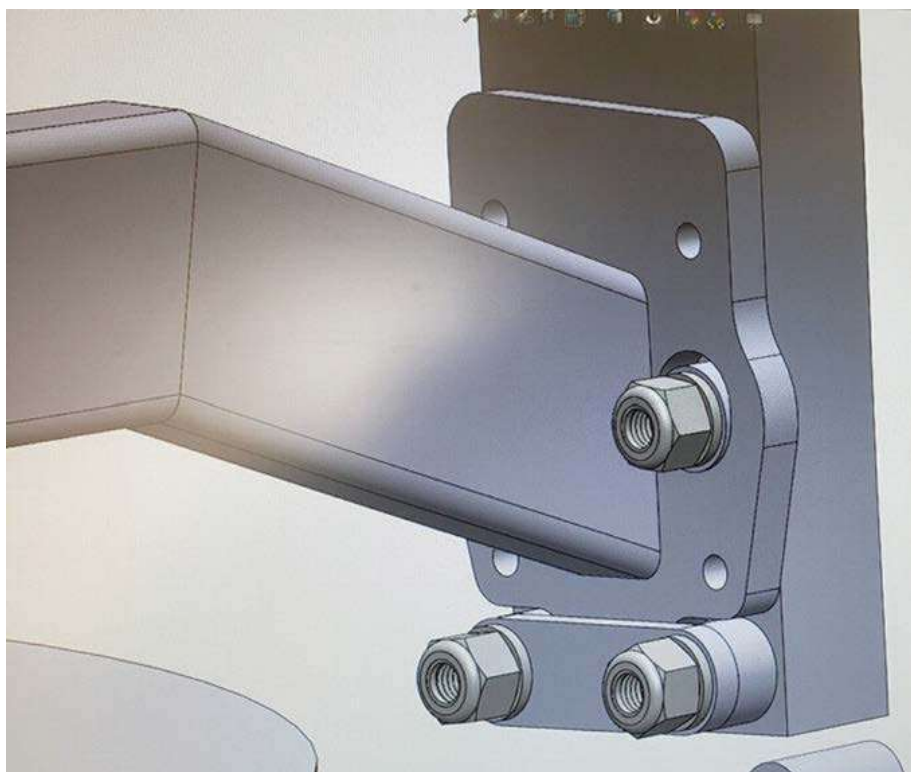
The lower bolts are lengthened with spacers. Matching holes are drilled into the larger plate.
